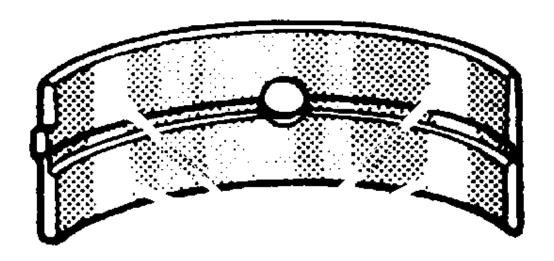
Crankshaft Bearing Polished Sections (Improper Seating) Courtesy of GENERAL MOTORS CORP.
